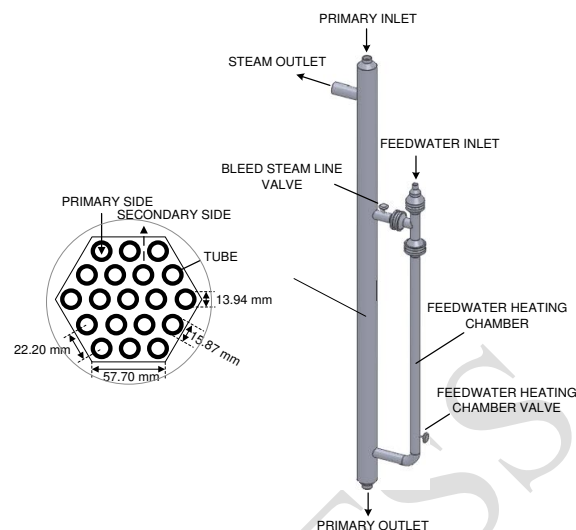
Cross-sectional view of B&W OTSG test section with 19 tubes [10].
